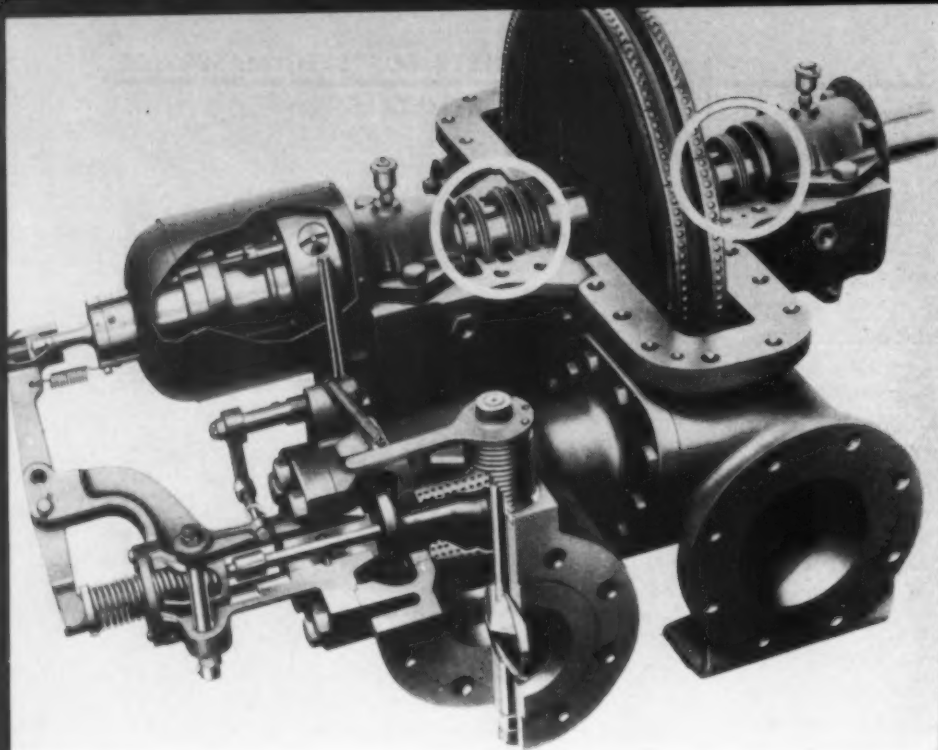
High chrome-nickel steel sprayed on the shaft at the two gland zones of this Westinghouse turbine prevents corrosion and rust-cutting of the carbon gland segments
